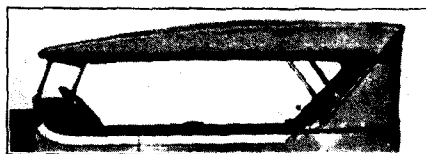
Remove the nickel-plated caps on the sockets for the top (hood) supports and install the supports by pushing them into the sockets and tightening the cap screws.
